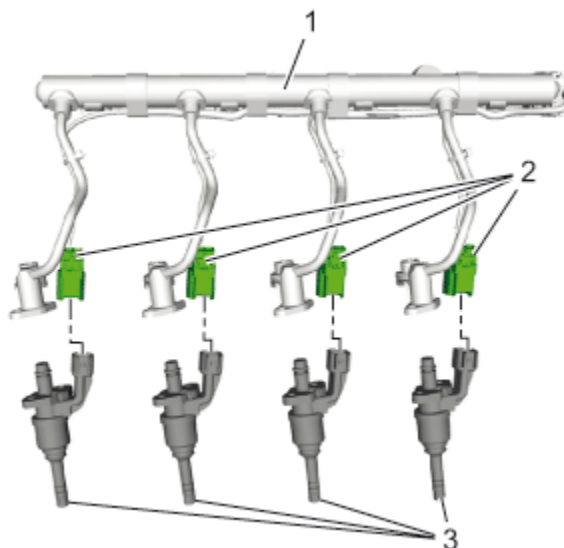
Fuel Injection Fuel Rail, Fuel Injector And Wiring Harness
